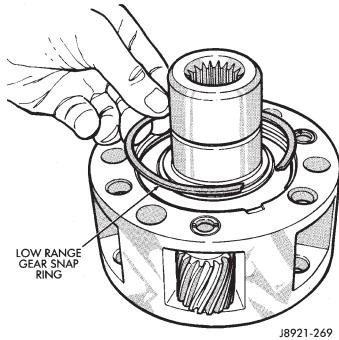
Low Range Gear Snap-Ring Removal/ Installation
